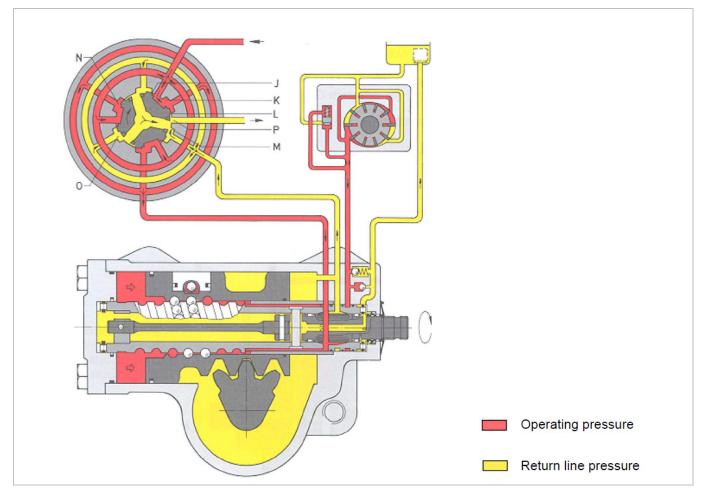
Valve rotor in operating position, Steering wheel turned clockwise, piston with right-handed thread
